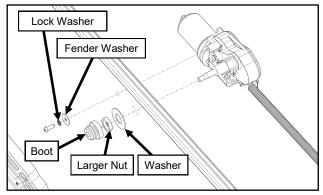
(Install Wiper Motor onto Installed Winshield)
